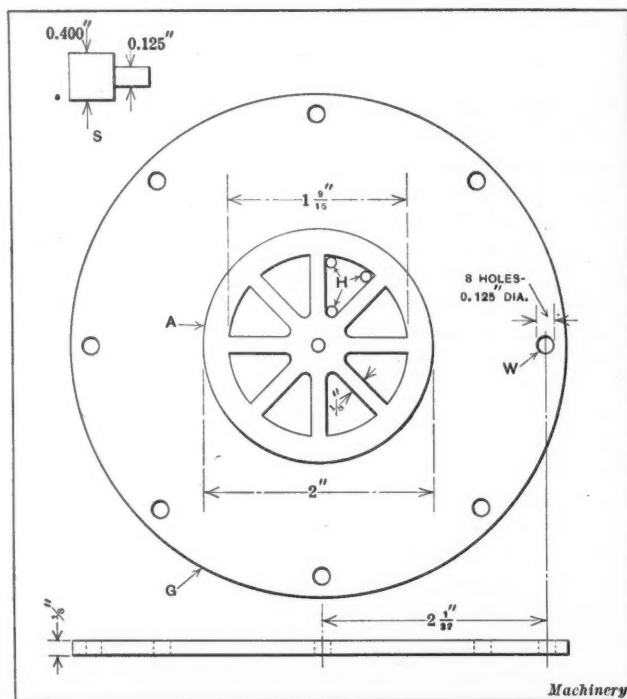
Lay-out Plate used in making the Spoked Wheel Die
